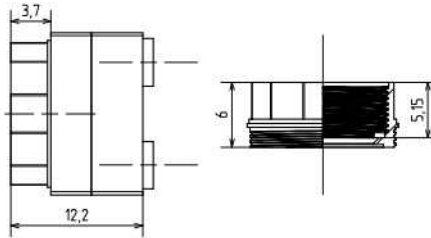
, lens mount adapter ADAPT-M, mechanical drawing
